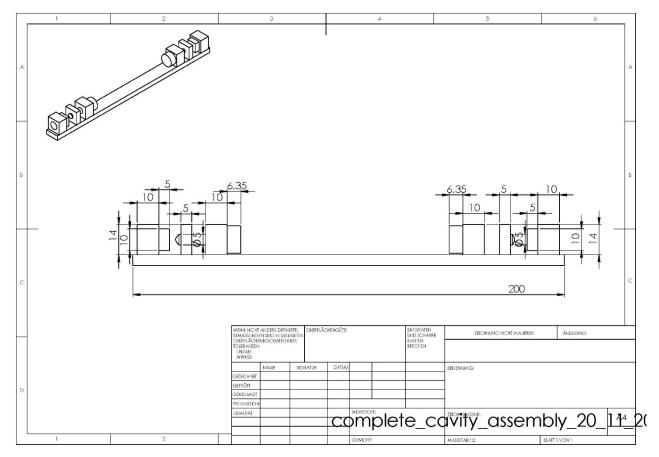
Dimensions of the cavity assembly in mm. The in the left-hand upper corner shows an isometric view of the cavity assembly as is also given in Figure 1.
